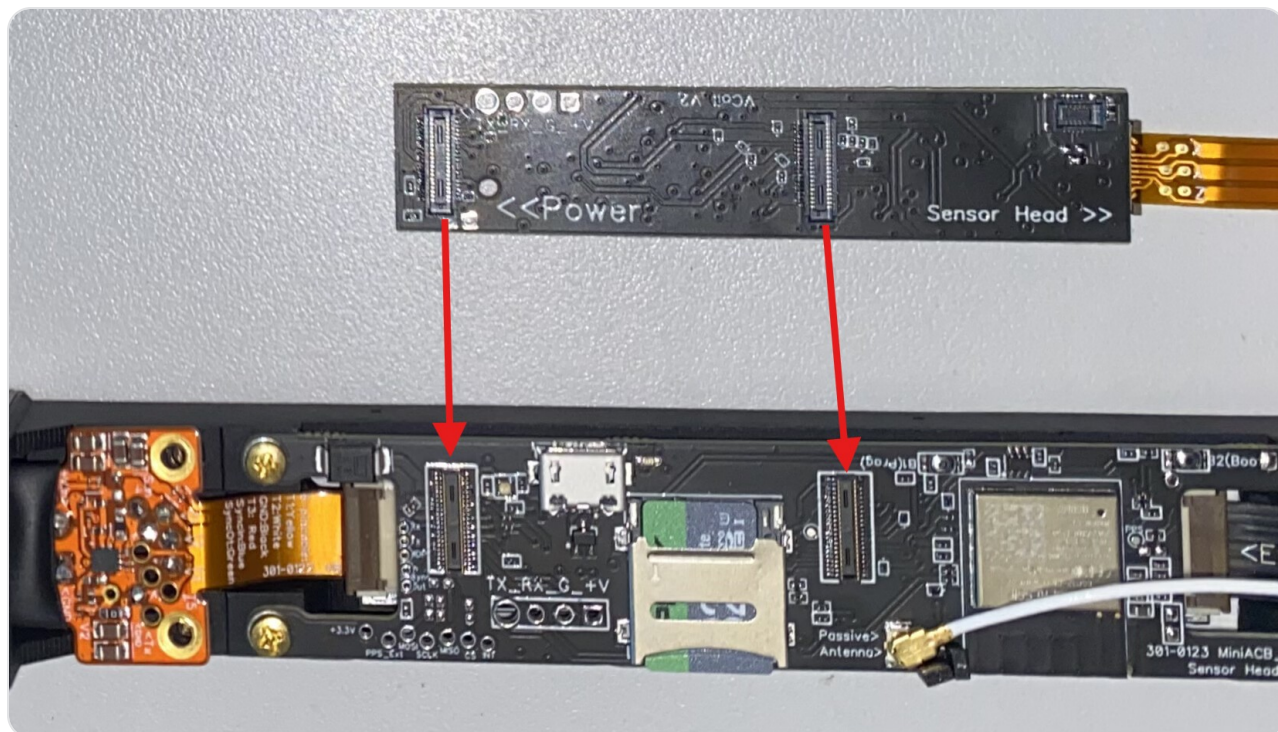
Snap the vector top board onto the MiniACB, then attach the vector coil flex cable to the board's flex connector.
